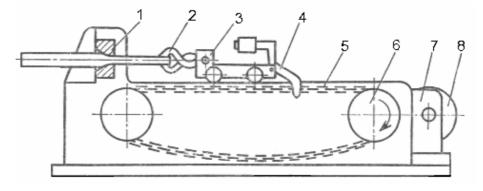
Chain draw bench: 1 – die; 2 – draw vice; 3 – slide; 4 – draw hook; 5 – chain; 6 – drive sprocket; 7 – reducer; 8 – electric motor
